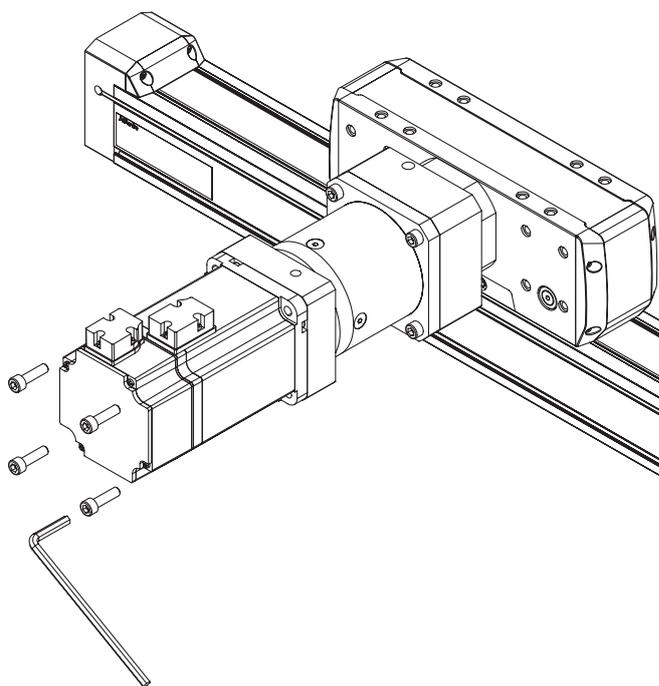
Bolting the motor to the cantilever axis HC-B with gears
